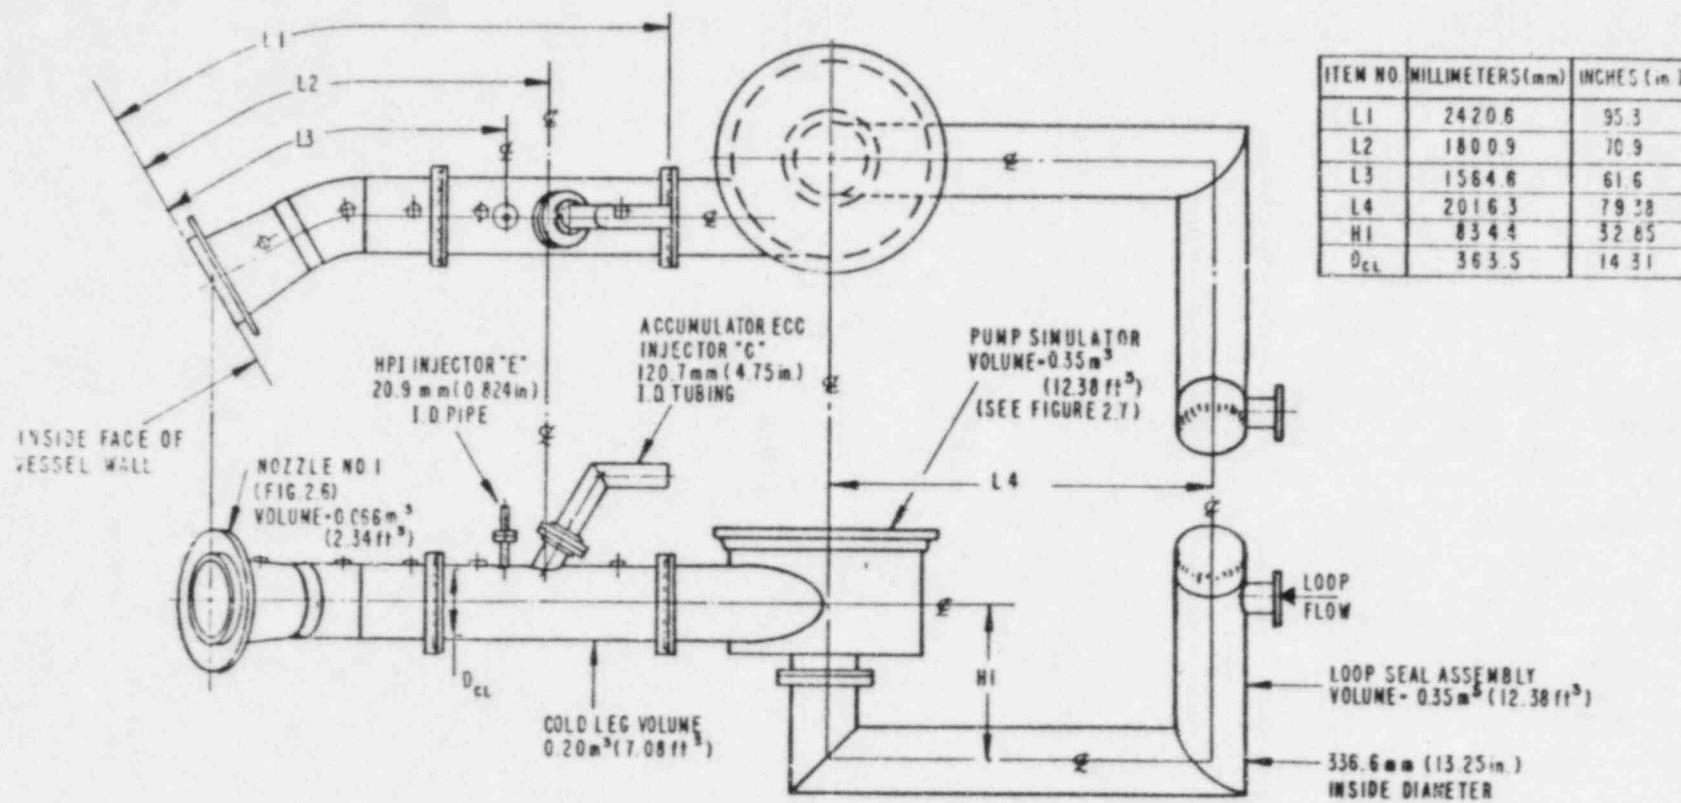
Horizontal Cold Leg Assembly Number 1
